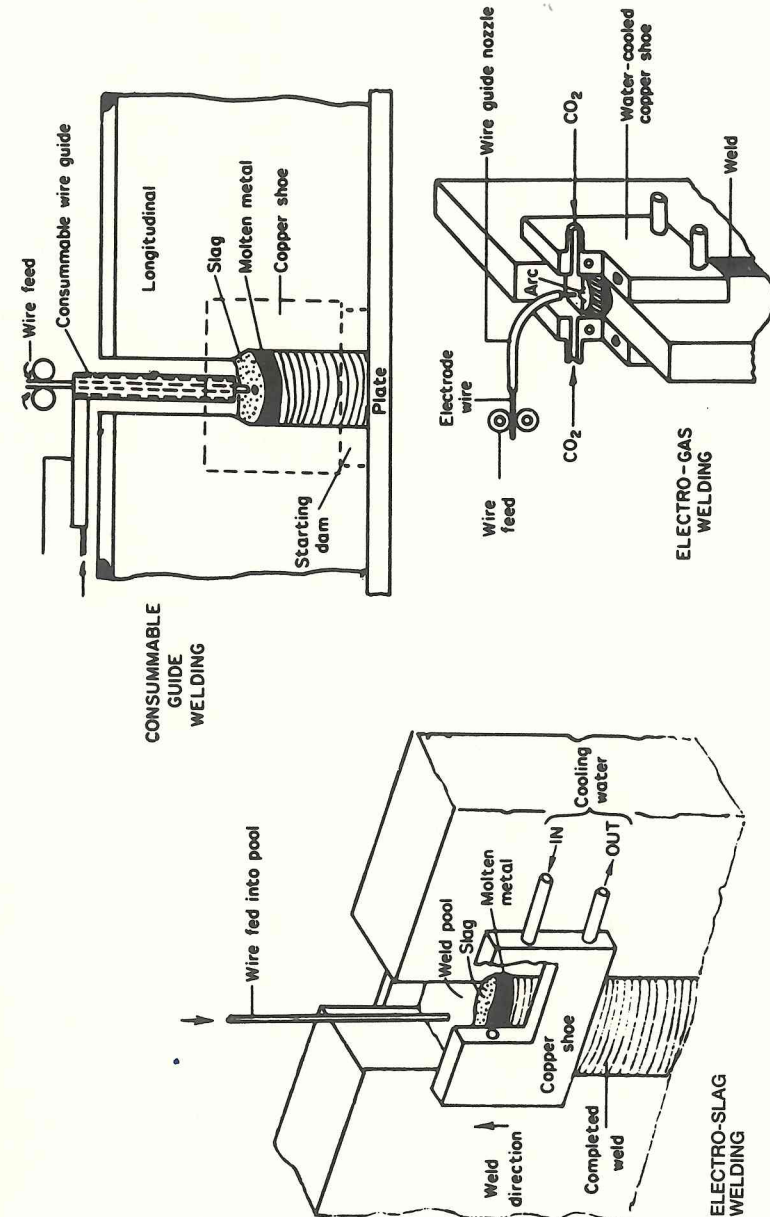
Electro-slag and Electro-gas welding
